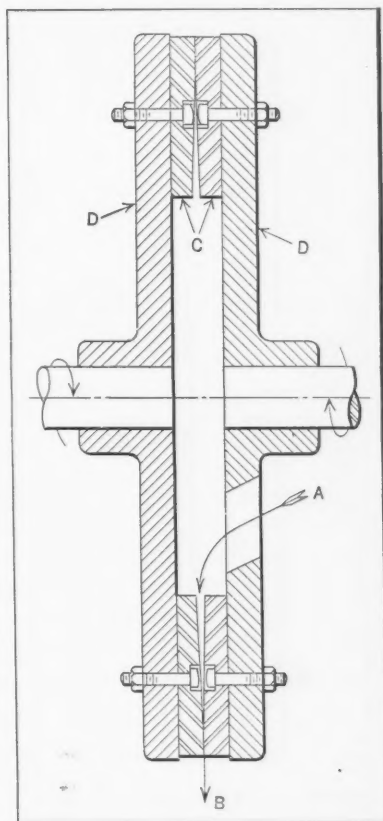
Assembly of Attrition Mill Plates *C* on Their Driving Disks
